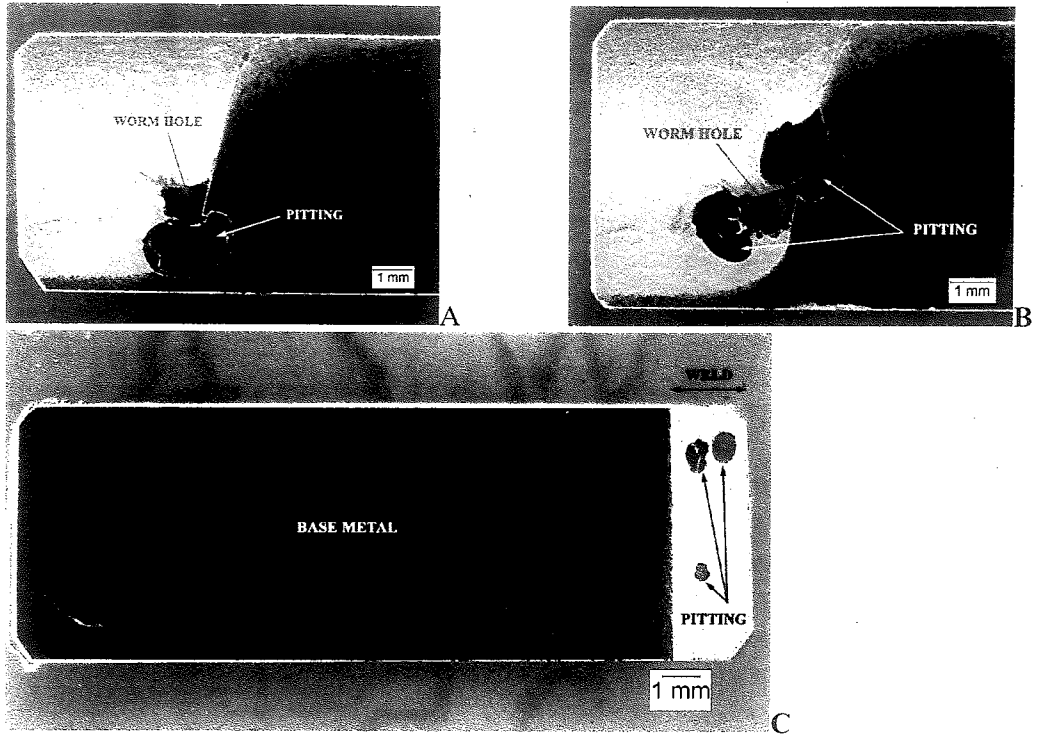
Pitting at 55°C of the CPT samples at A and B) the worm hole and tungsten and C) the crown side of the FS weld.
